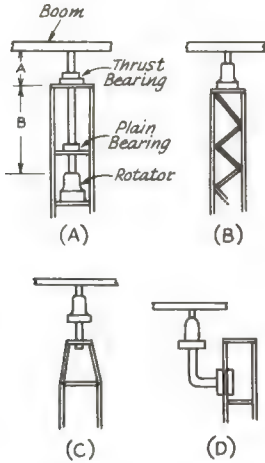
Methods of mounting a rotator at the top of a tower.
